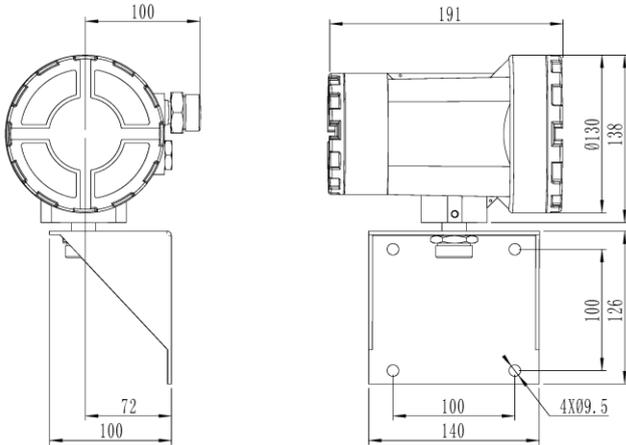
The overall dimensions of T1000 transmitter and mounting holder for separated flowmeter.
